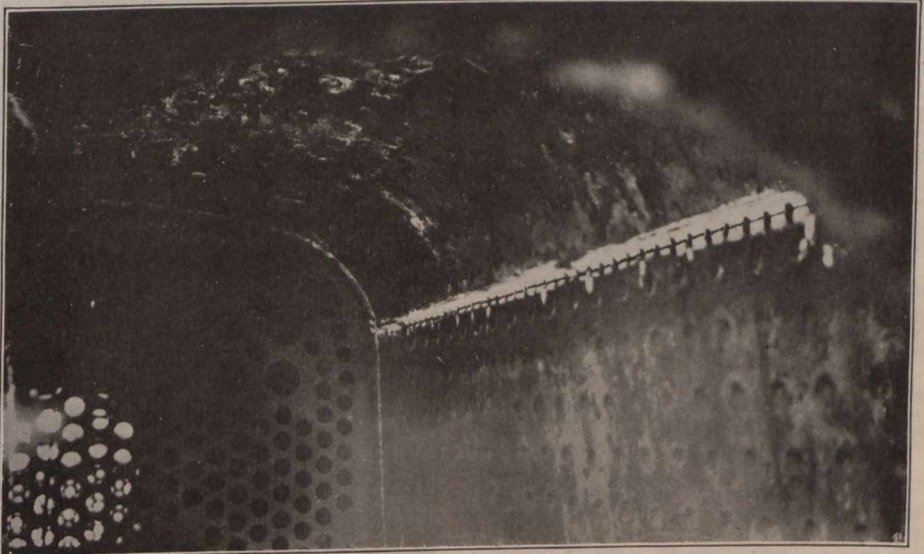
Sheet Inside Fire Box Ready for Welding.
